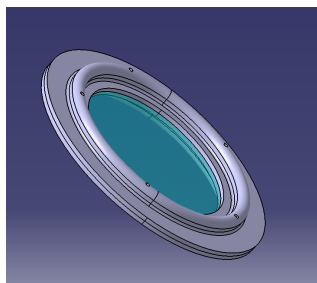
3D view of the diamond disk brazed on its copper ring.
